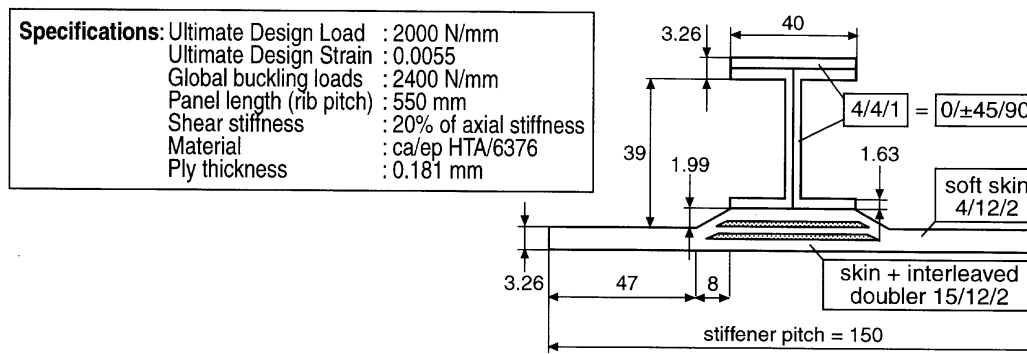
Design specifications, geometry and lay-up (dimensions in mm)
